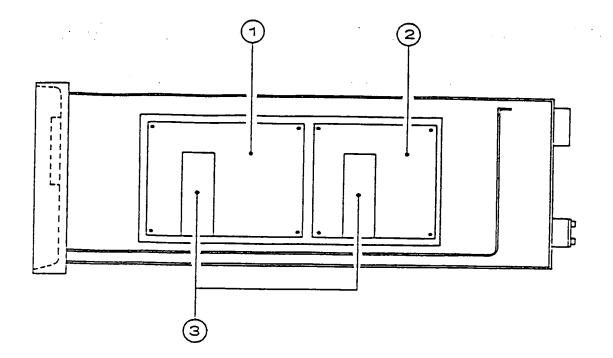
Major Internal Components - Circuit Board Side. (Shown with cover removed).
